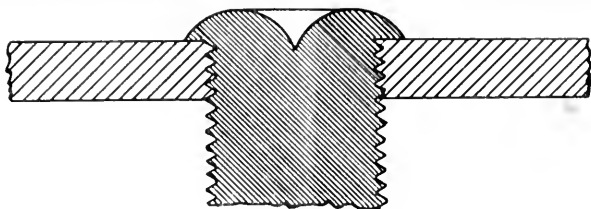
SECTION OF A WELL FORMED STAY-BOLT HEAD.
